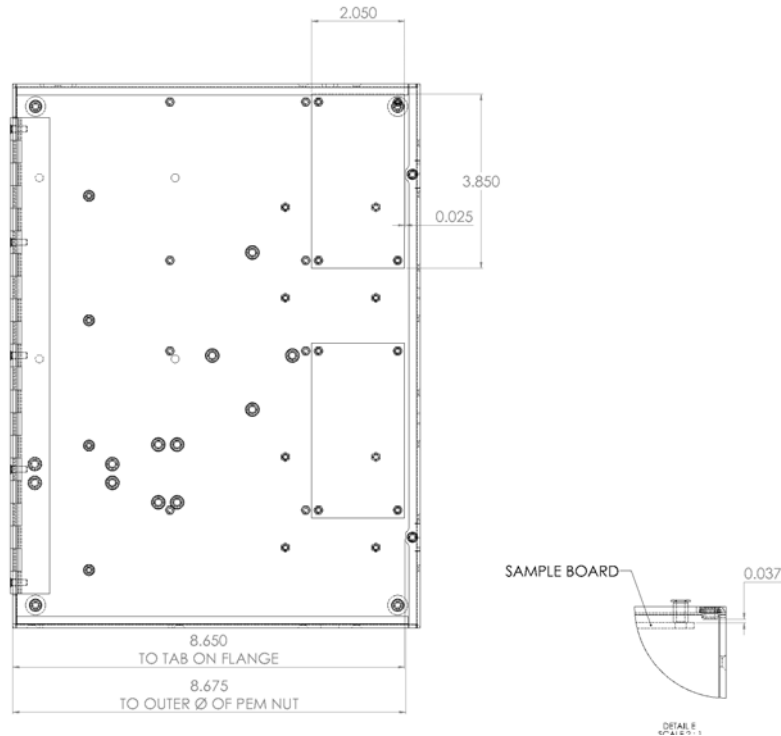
Dimensions and specifications for relay board lid mounting for MANGO (dimensions are in mm).
